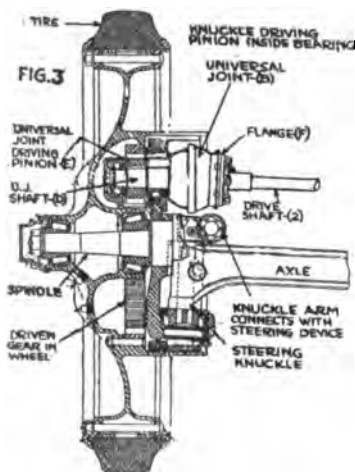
One of the 4 wheels illustrating how the shaft (D) of universal joint (B), on which is a pinion (E) drives internal gear in wheel.
